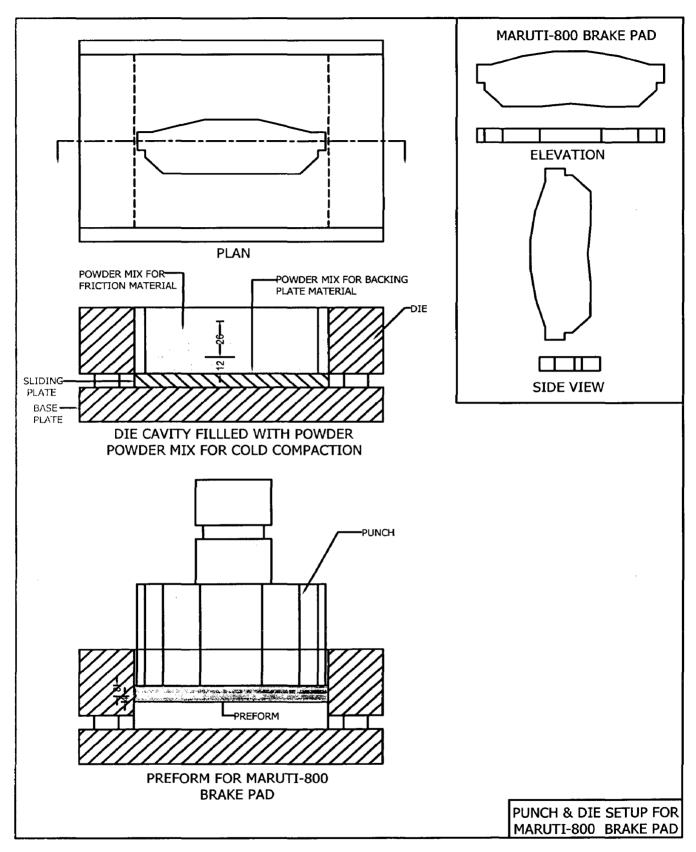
Punch & die setup for Maruti-800 brake pad
